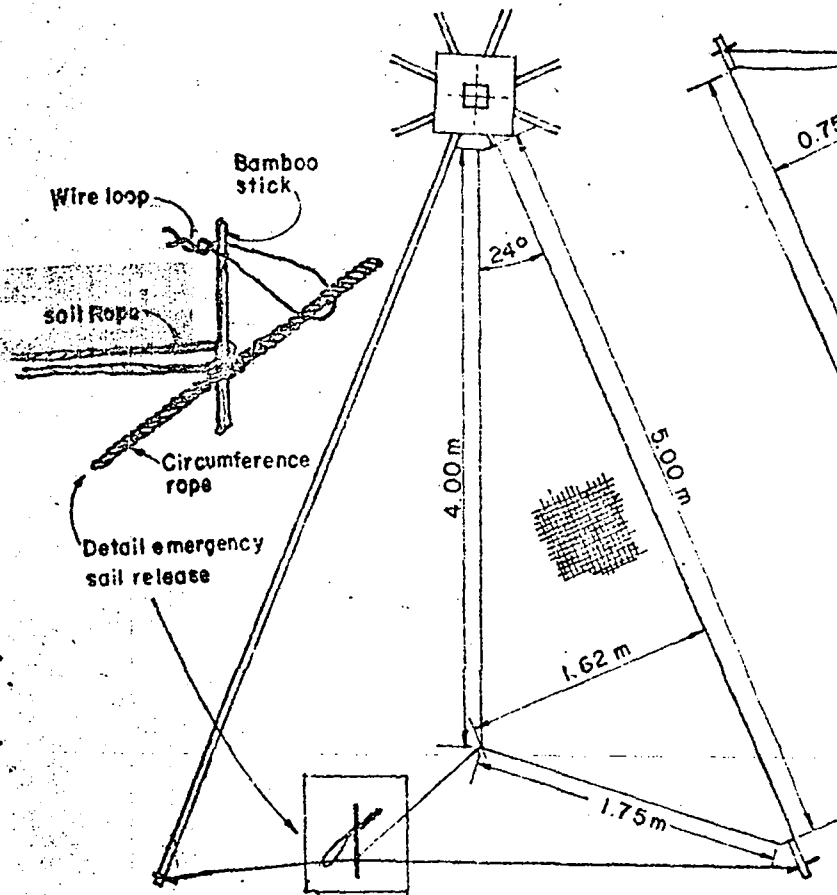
Cloth sail rotors: Greek sail wind rotor configuration
